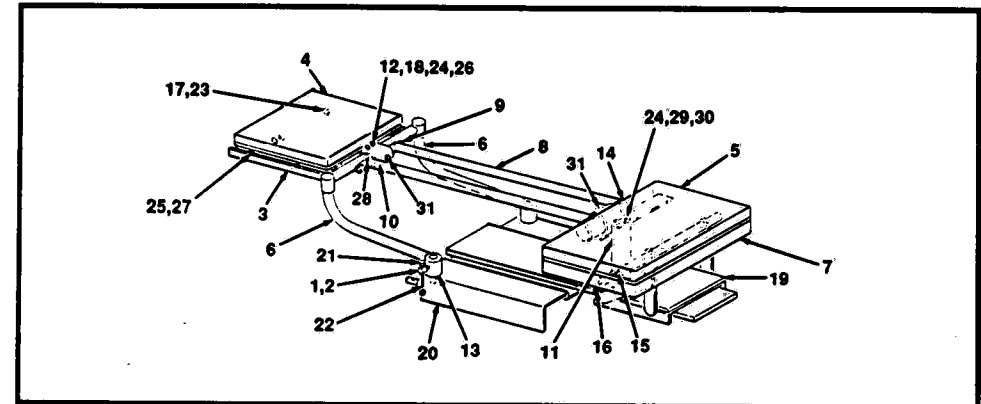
SEAT AND HEAD SECTION WITH IRONS ASSEMBLY (BF00-013).
